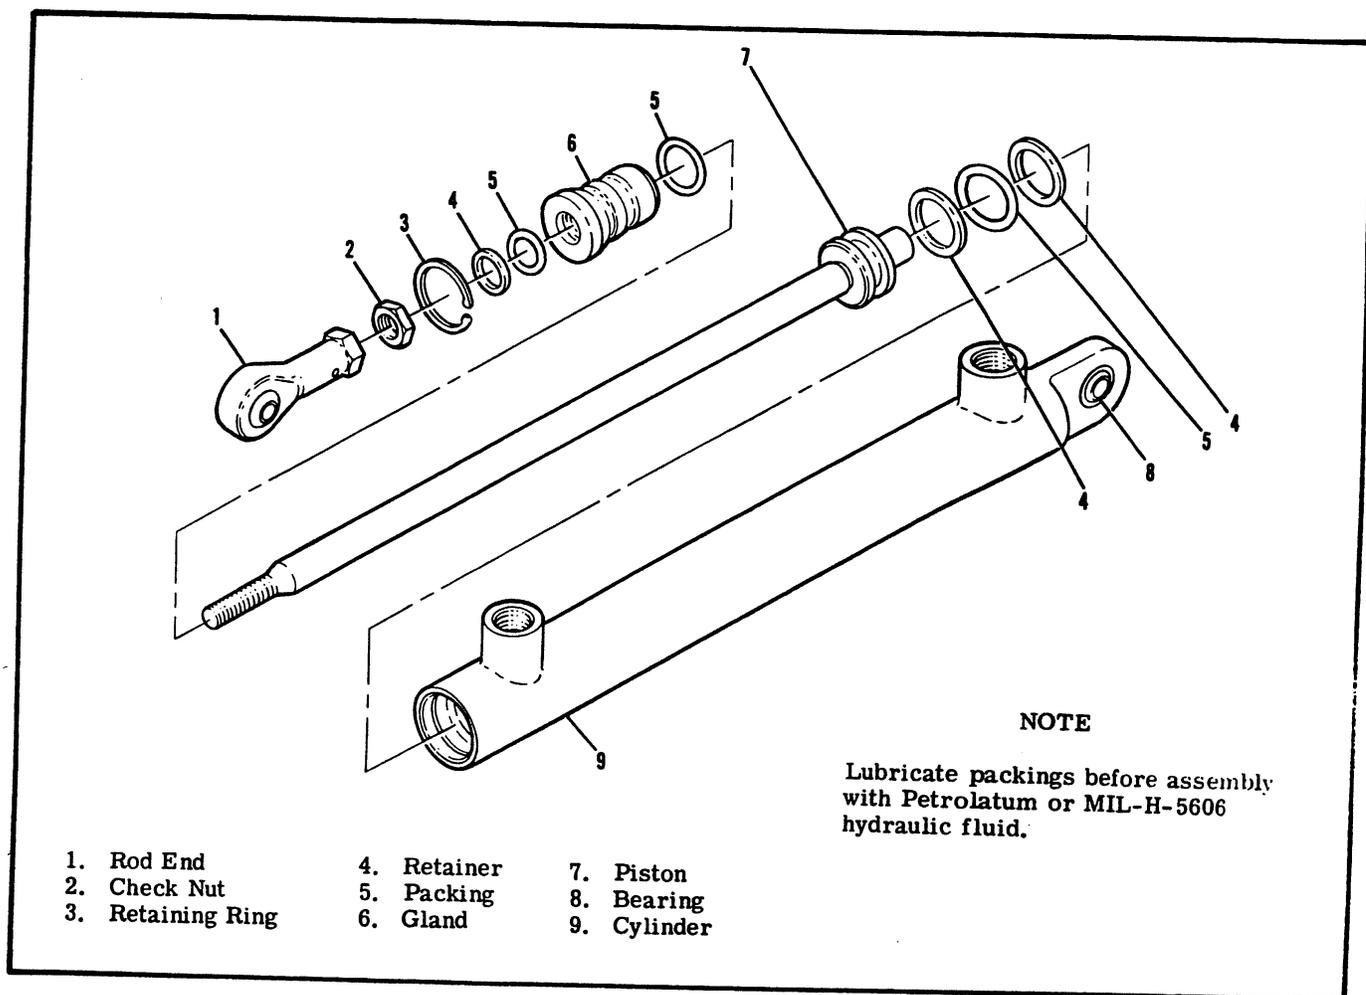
Landing Gear Door Actuator (Sheet 2 of 2)
